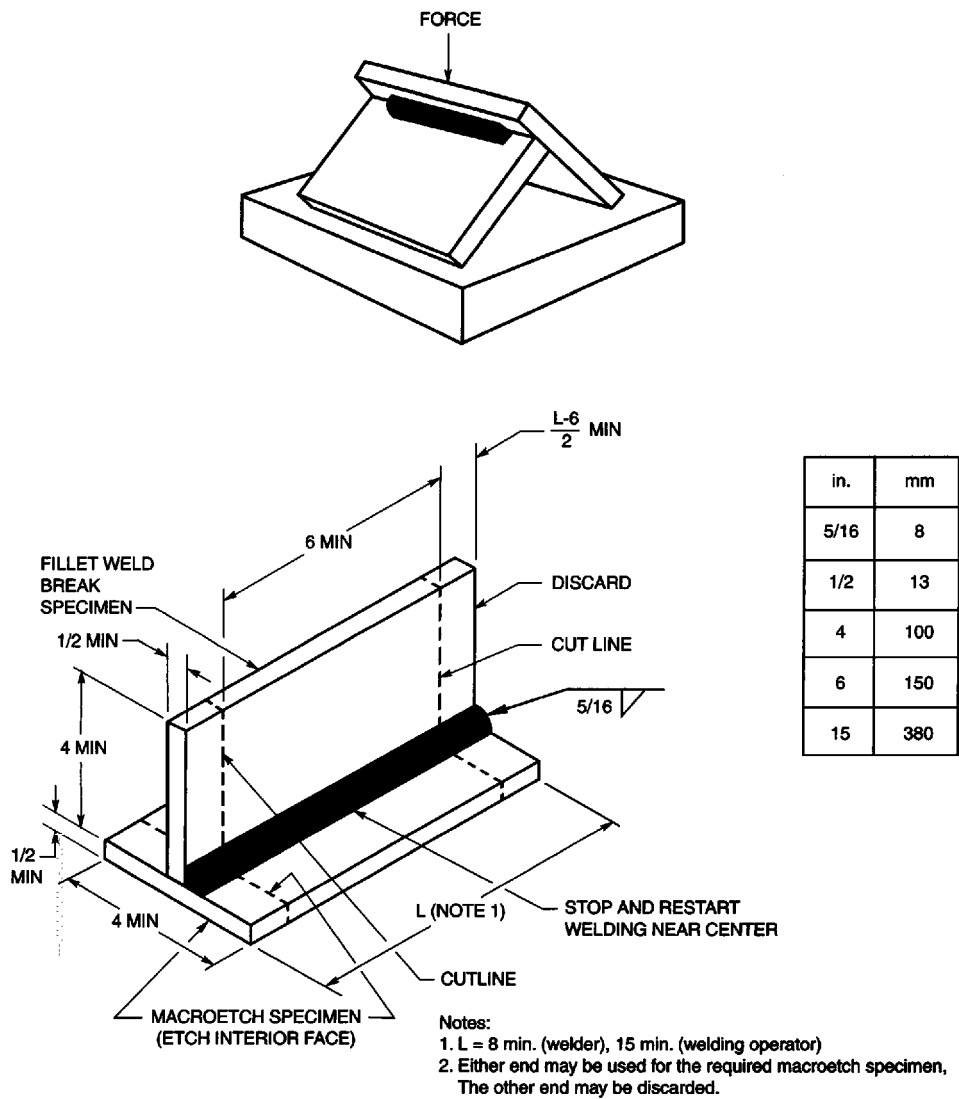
Typical Fillet Weld Break and Macroetch Test for Fillet Welder or Welding Operator Qualification
